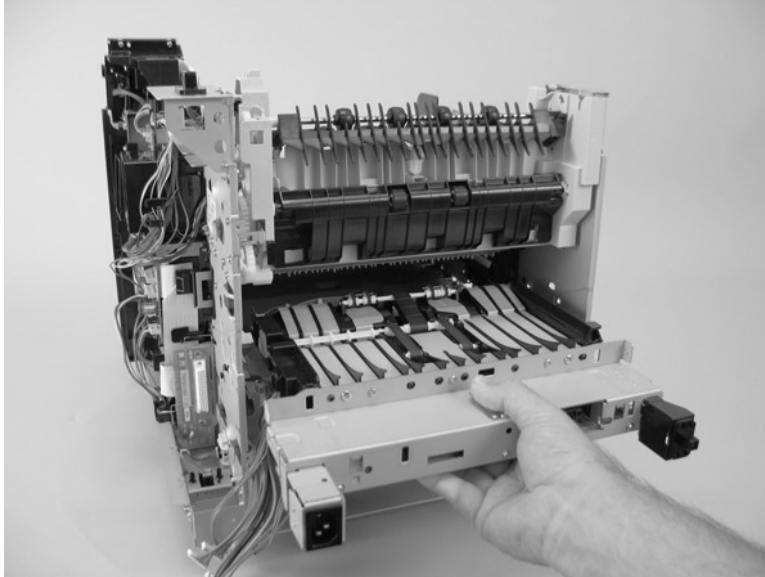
Remove the high-voltage power-supply assembly (7 of 8)
